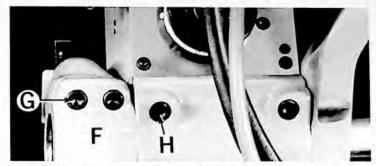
Clamping Bolts for Chasing Head and Guide Bar Bracket
